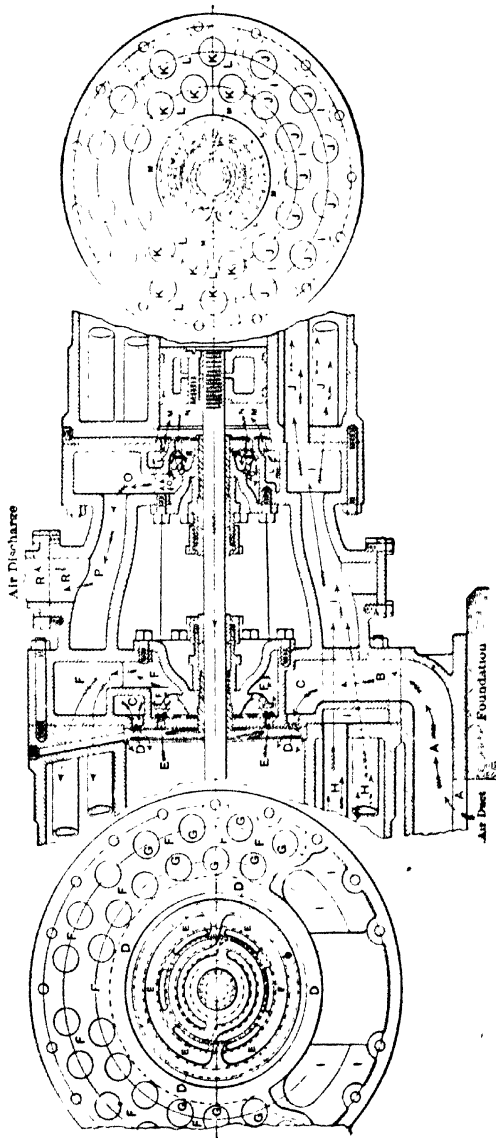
Leyner Compressor. Part Section, Showing Flat Annular Inlet and Delivery Valves.
